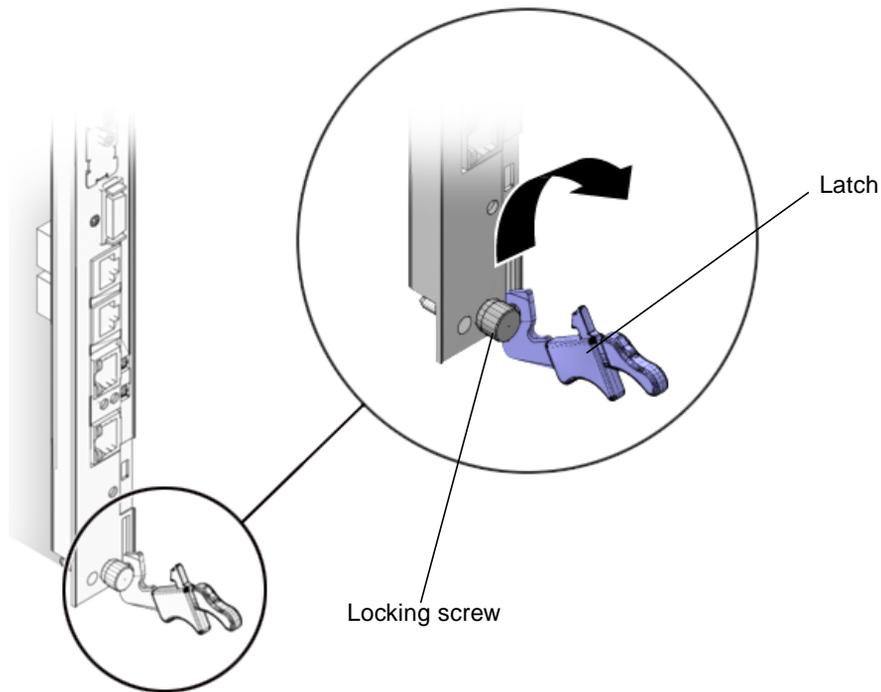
Injector/Ejector Latch and Locking Screw
